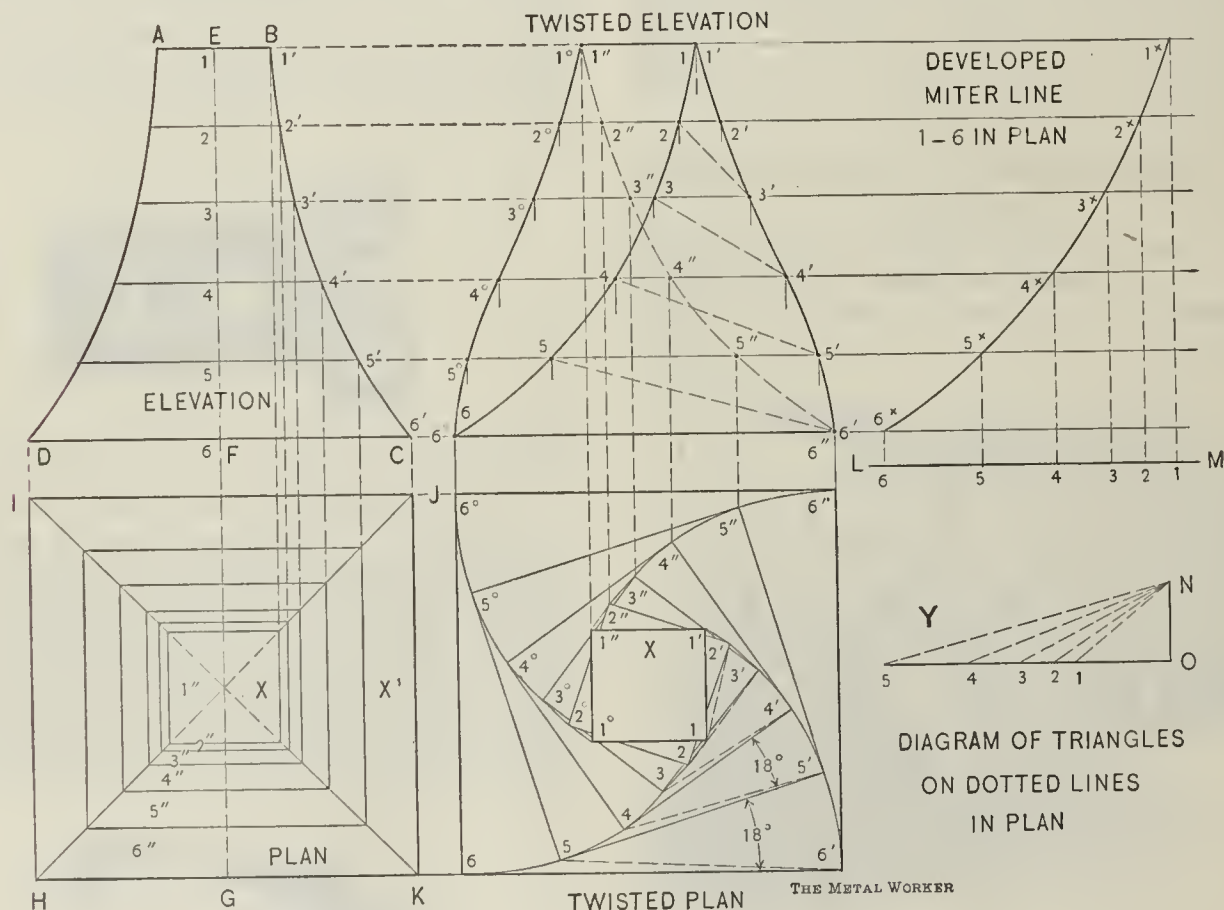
Plans, Elevations and Developed Miter Lines and Triangles.
